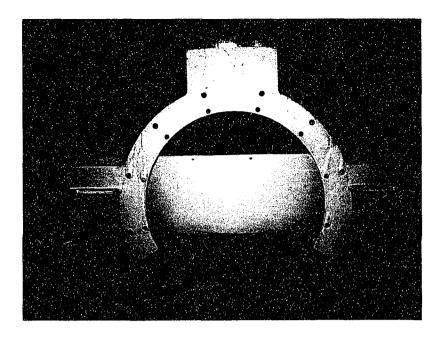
Typical Engine Rear Mounting Plate Used to Mount the Engine on the Dynamometer Test Sled
